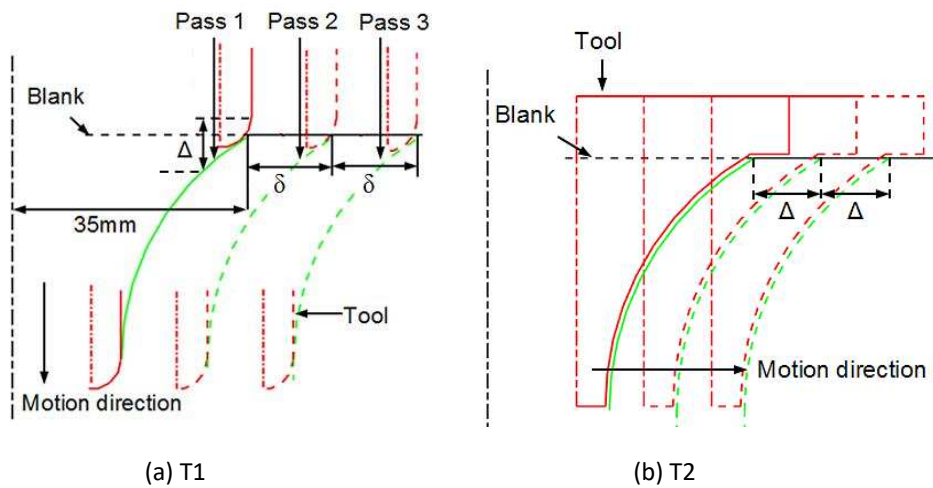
Hole-expansion illustration by two different hole-flanging tools.
